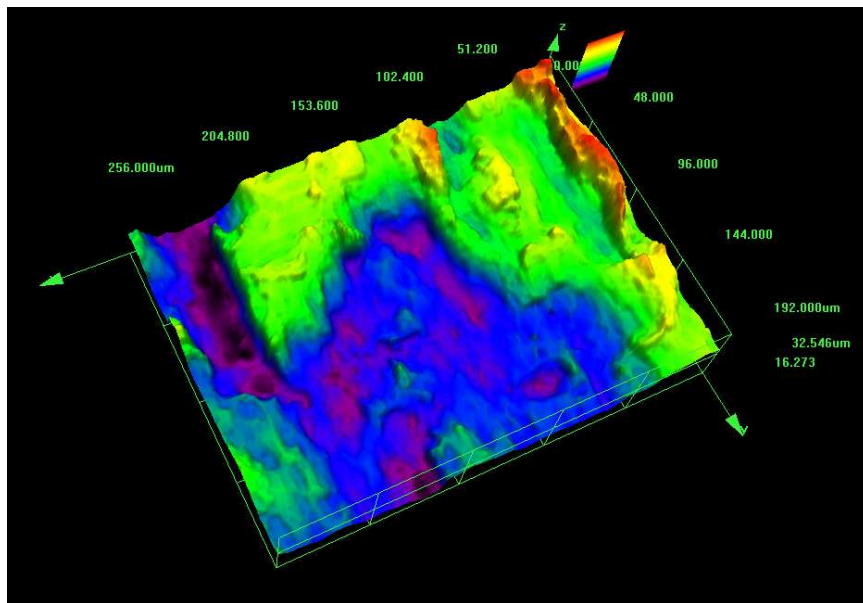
Three-dimensional view of fracture surface from shear test sample with height gradient processing applied.
